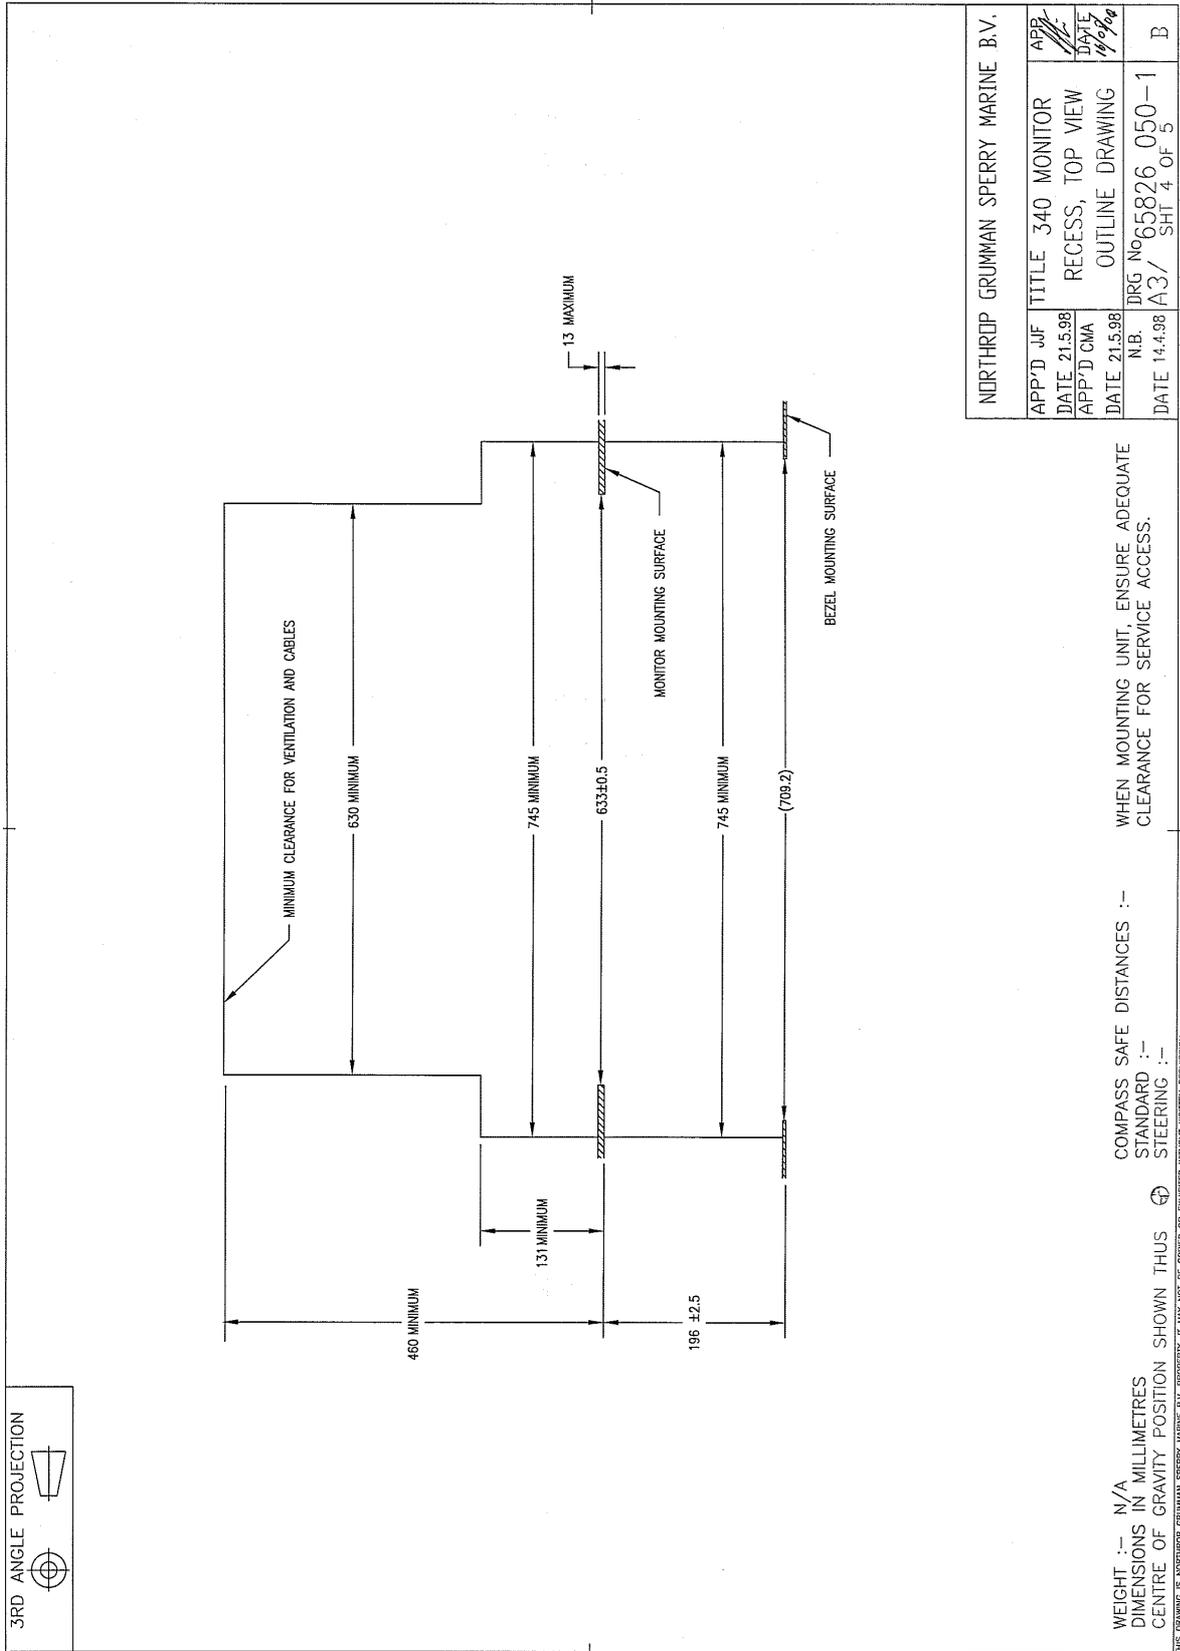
340 Monitor Module (CRT) Outline Drawing (Sheet 4 of 5)
